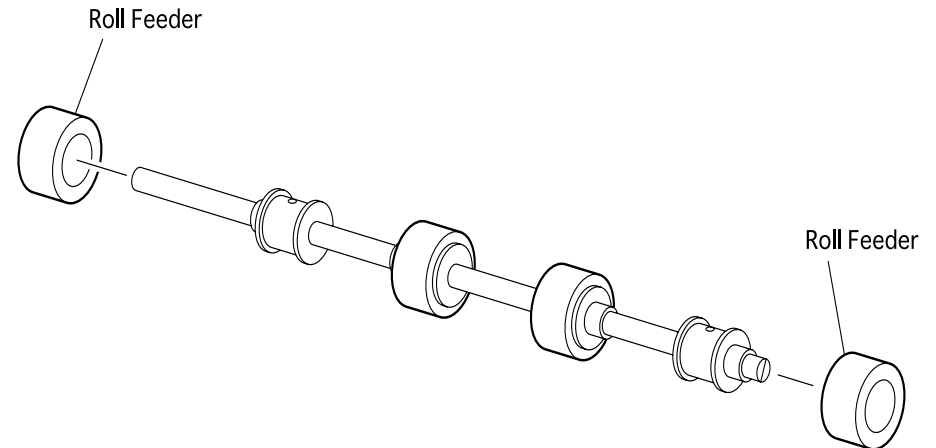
Roll Feeder: Roll Feed2 Removal
